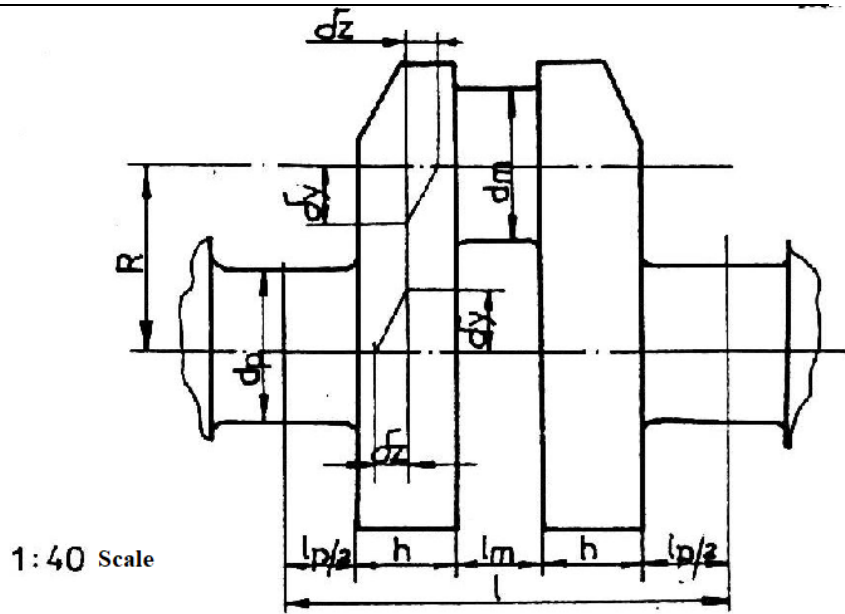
Dimensions for a crank fitted on the Sulzer 6RND90 main engine
